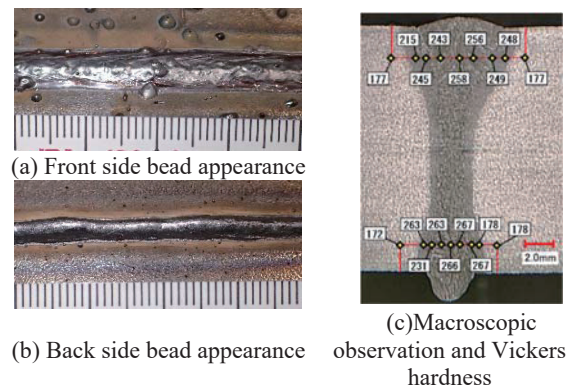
Weld bead fabricated a test piece with a bevel by plasma cutting.
